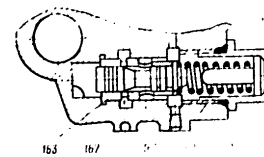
HP-10A Unit. Minimum Pressure Valve
